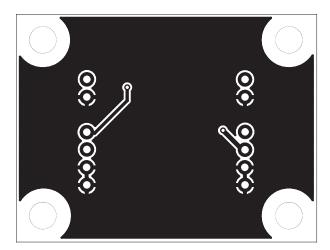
Recommended PCB Layout for TPS6050x (bottom layer)
